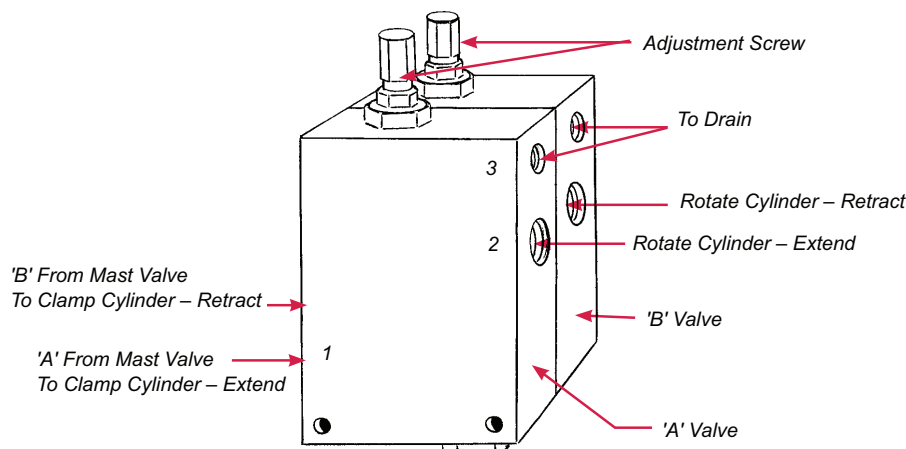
Sequence Valves for Breakout Wrench – refer to schematic, Fig. 7-43
